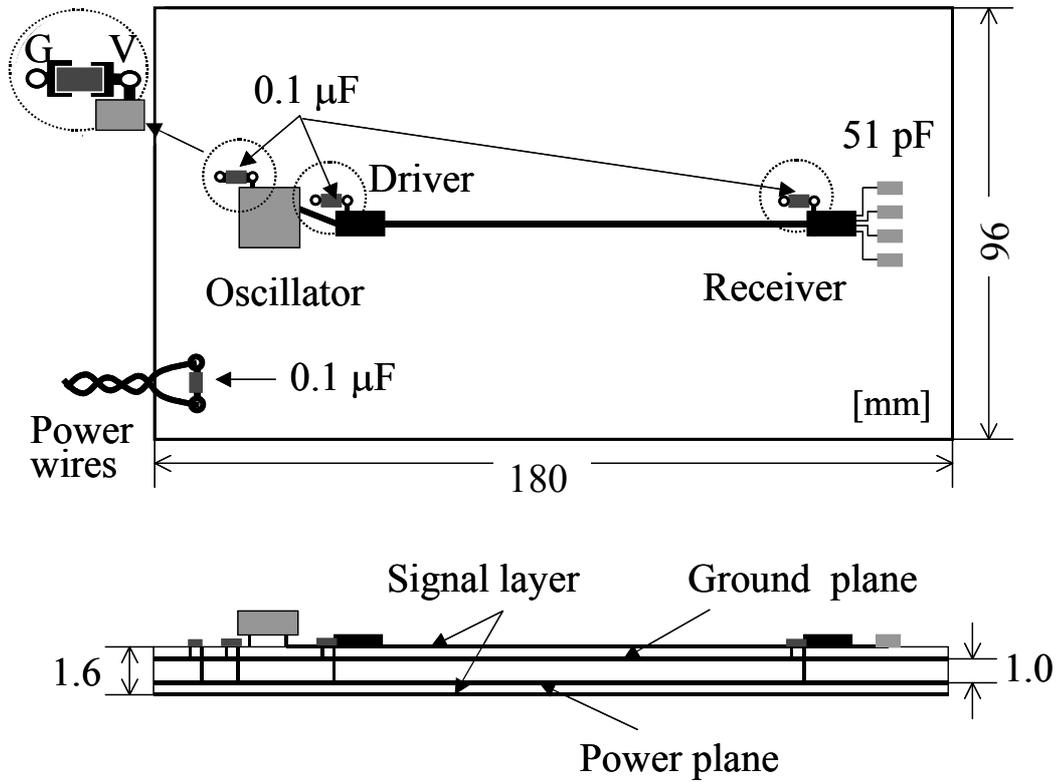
Top and side views of a fabricated four-layer PCB with Circuit A.
